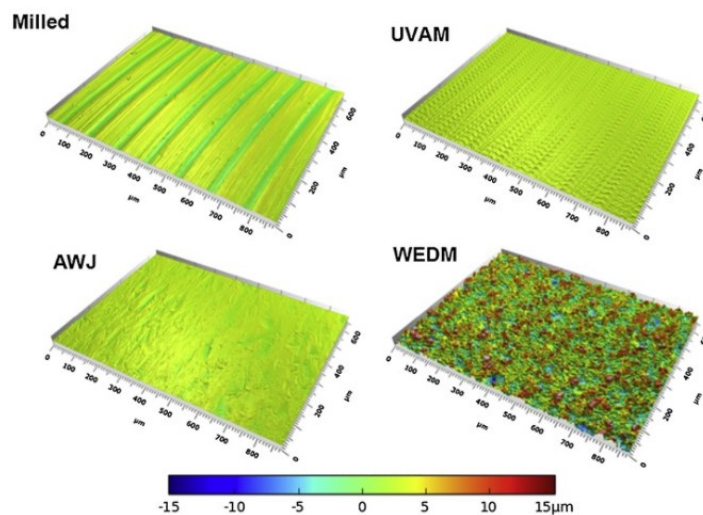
3D view of the machined surfaces machined with conventional milling and non-conventional milling methods (Abrasive Jet Water - AWJ, Electrical Discharge Machining - WEDM and Ultrasound Vibration Assisted Milling - UVAM) observed in the work of Suárez et al. (2019).
